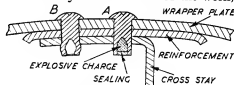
Section of a portion of a fabricated streamline strut, to show the application of explosive rivets. The rivet A is shown inserted ready for ignition, and that at B, after expansion.
